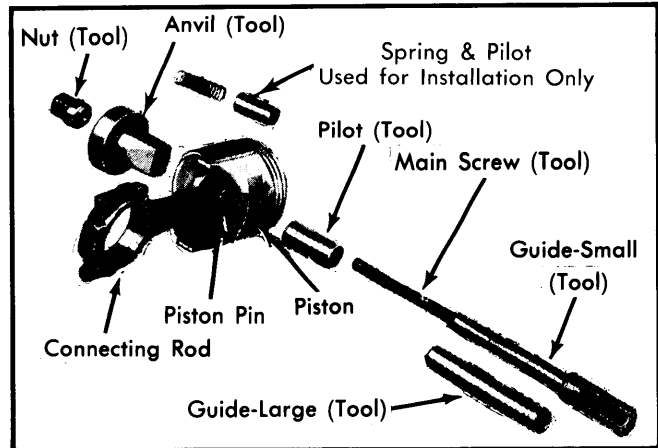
Tool Arrangement for Piston Pin Removal and Installation
